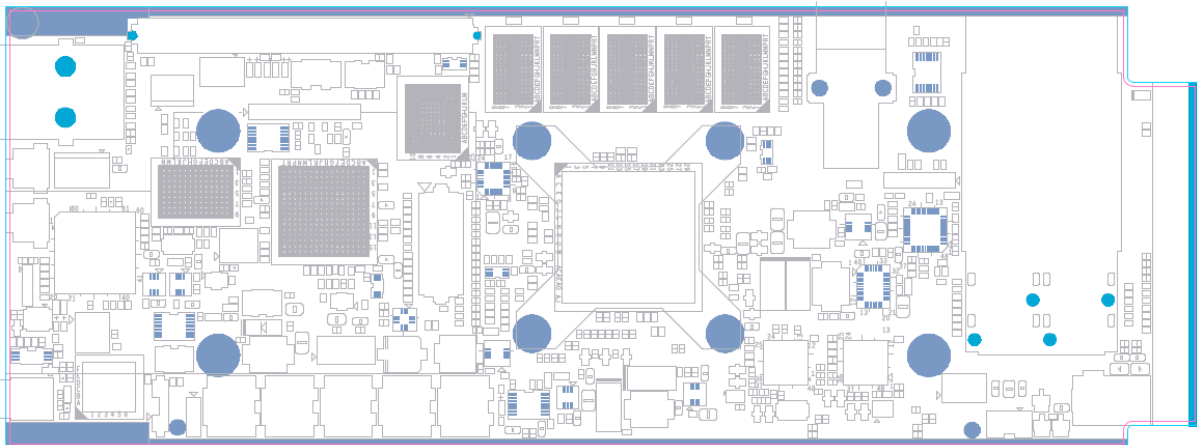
TMDXEVM6614LXE EVM Board Assembly Layout – TOP view
